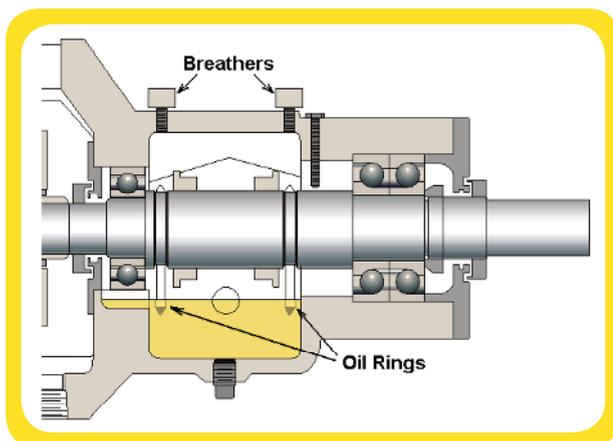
A typical bearing housing, shown here without modern bearing protector seals
